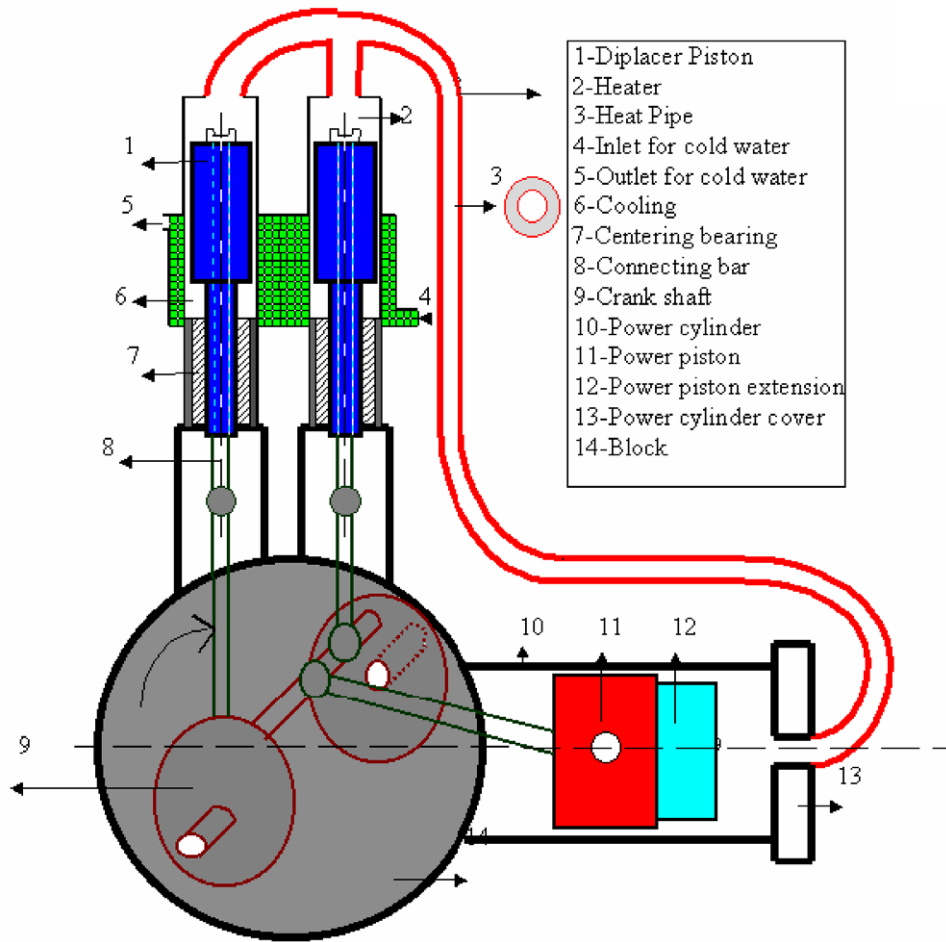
Schematic drawing of manufactured Stirling engine with two displacer pistons.
